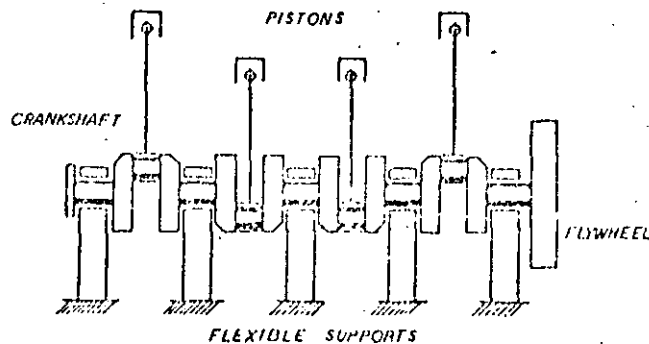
A Typical Crankshaft-Bearing System on Flexible Supports
